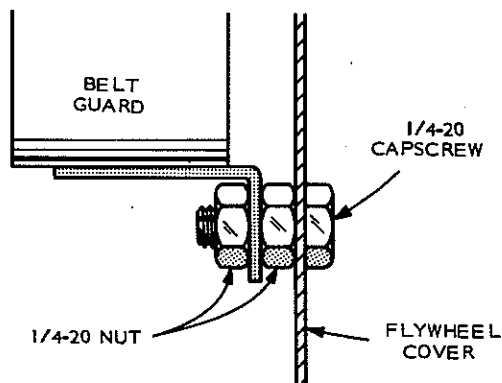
BELT GUARD MOUNTING (SEE STEP 11)
